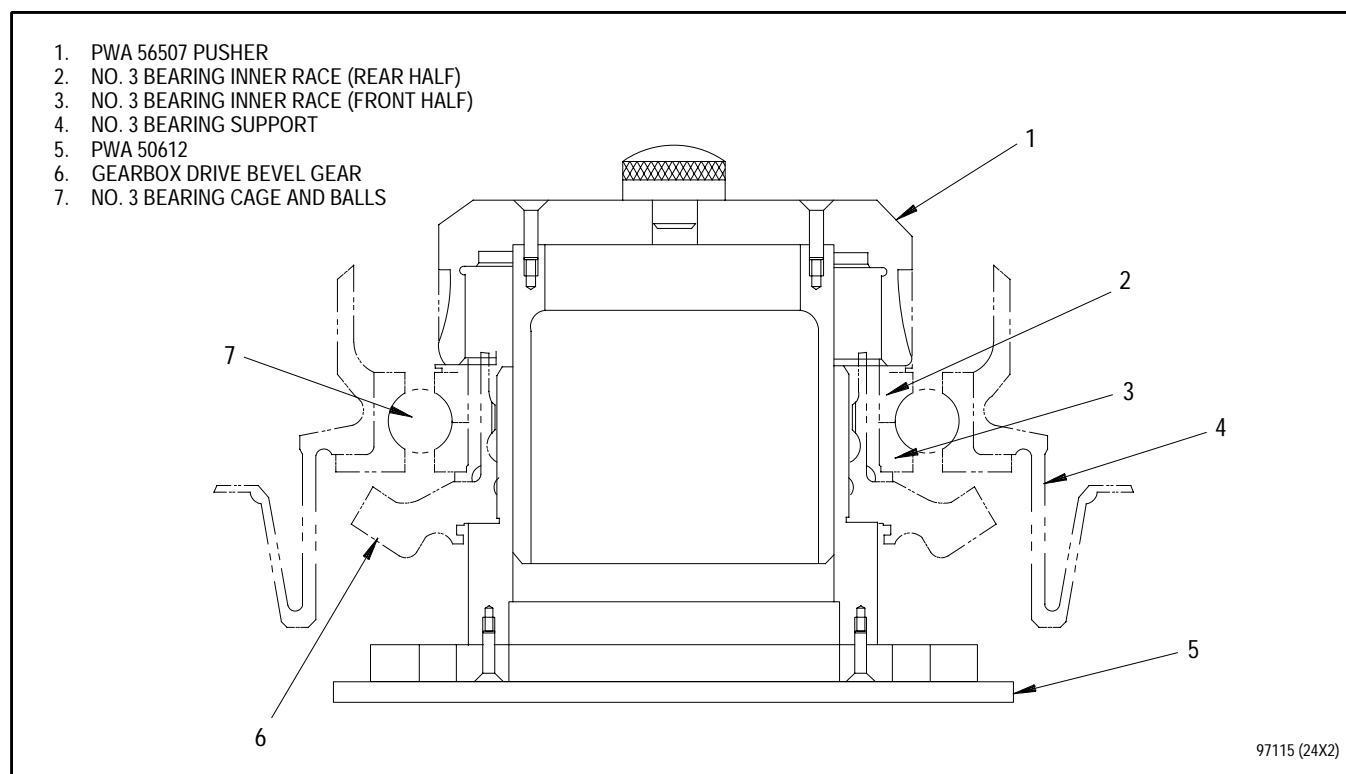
Inner Races and Balls - Installation Onto Gearbox Drive Bevel Gear
